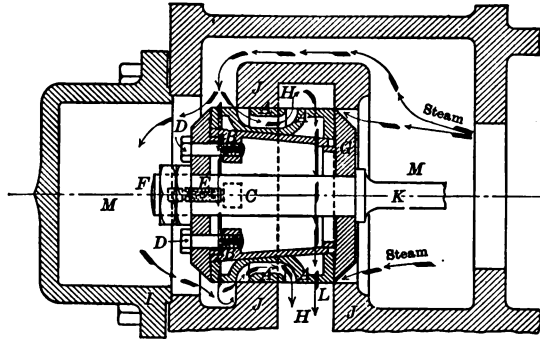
"FITCHBURG" DOUBLE-PORTED ADJUSTABLE PISTON VALVE
